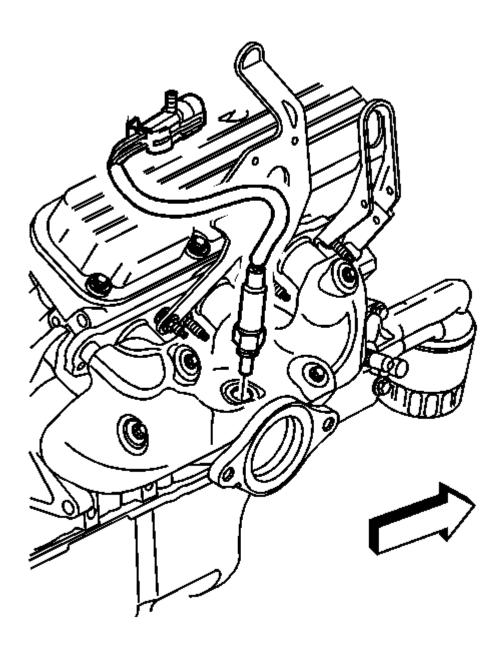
Exhaust Manifold Heat Shield Courtesy of GENERAL MOTORS CORP.
